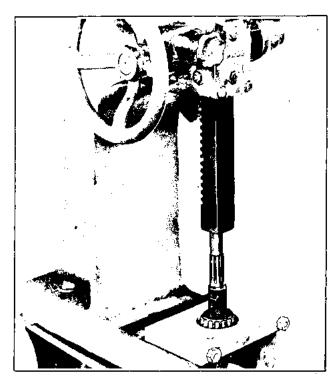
B-20. Removing Pinion Shaft Rear Bearing Cone
